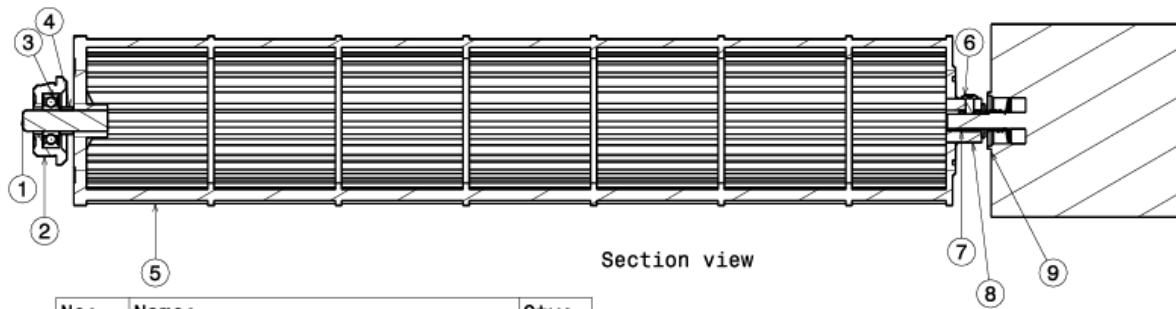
Section view of the turbine wheel, casing and motor assembly
